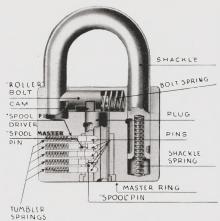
Cut open illustration of extruded brass pin tumbler padlock.
